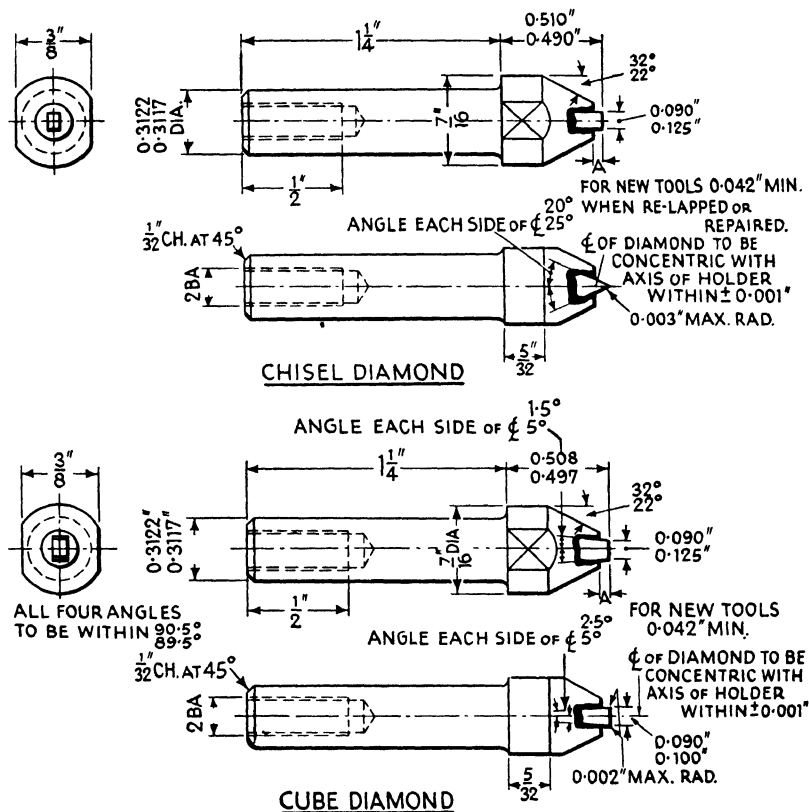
DIAMOND TOOLS FOR NEWALL GRINDING MACHINES
